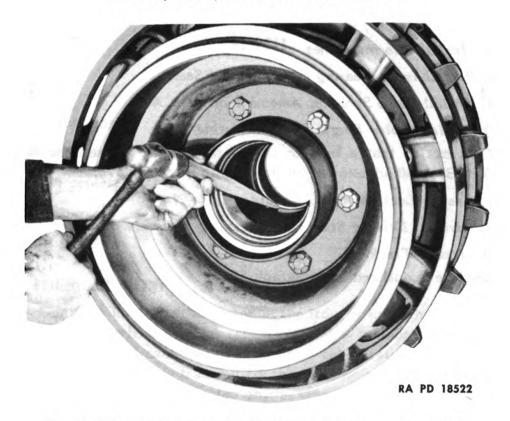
Drive Sprocket Hub Bearing Cone — Removal
